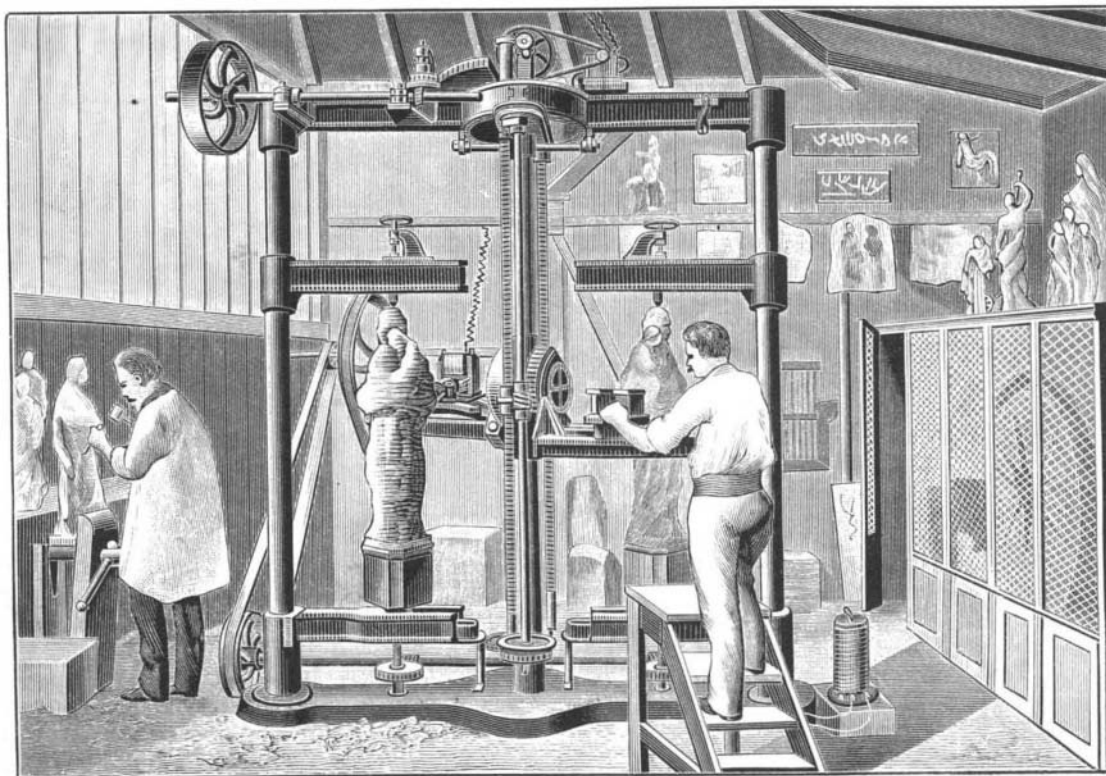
AUTOMATIC SCULPTURING MACHINE.
